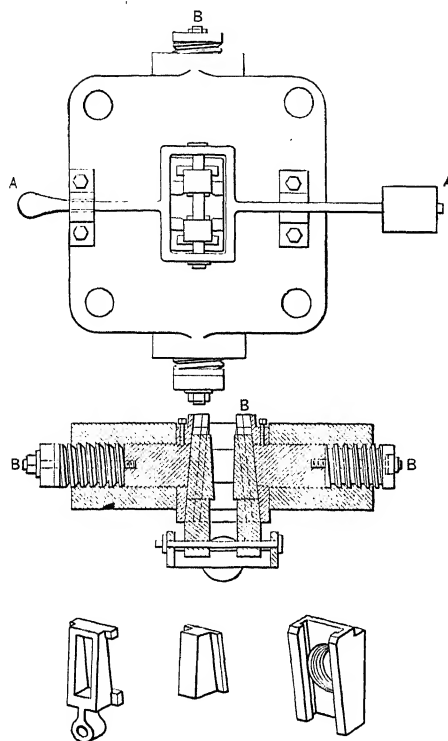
DRAW-HEAD OLSEN MACHINE.
